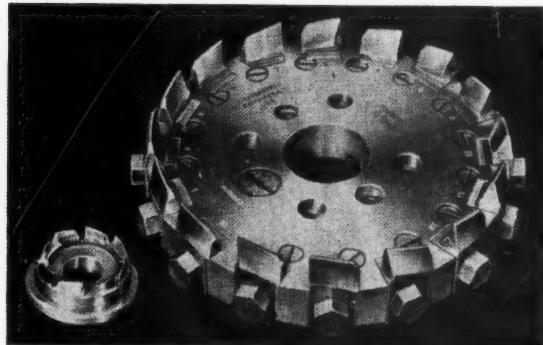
A. Typical spiral bevel, hypoid and Zerol gear cutters.
